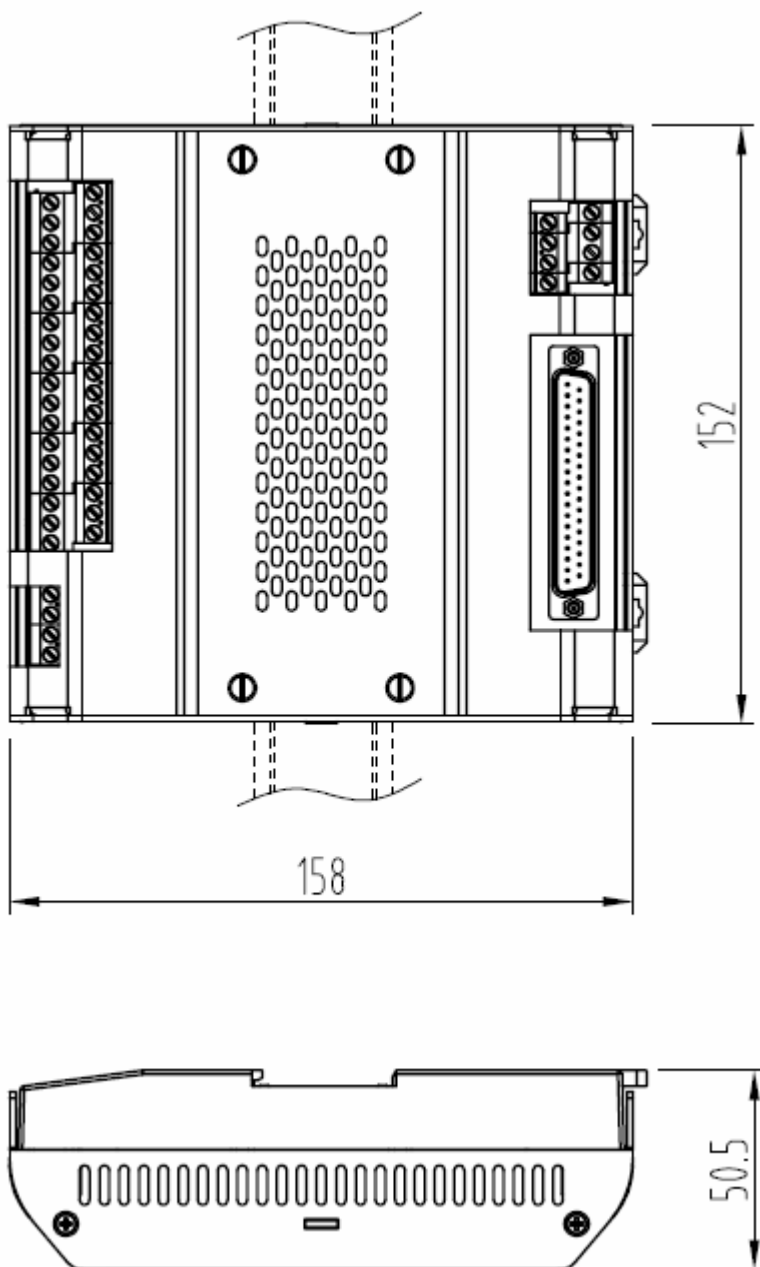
External Structural Diagram and Dimension of TU051-S
